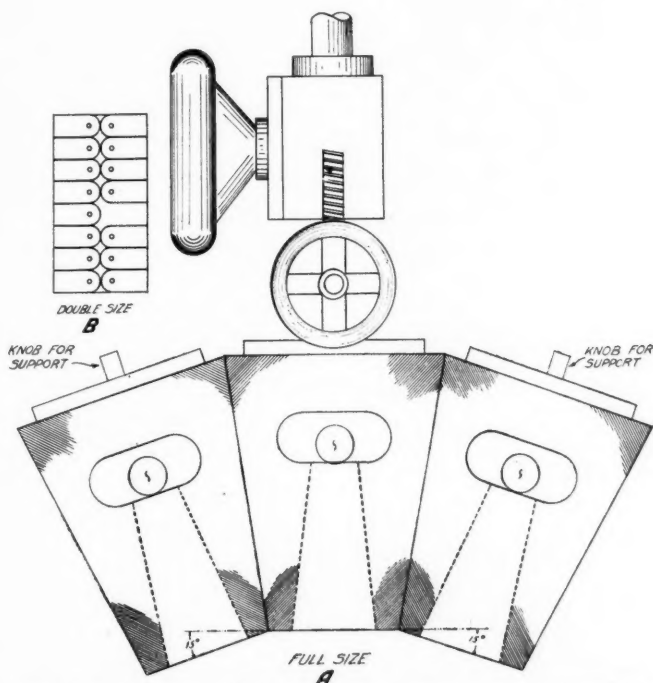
A. Assembly drawing of the three-section pack showing relation of various parts.
